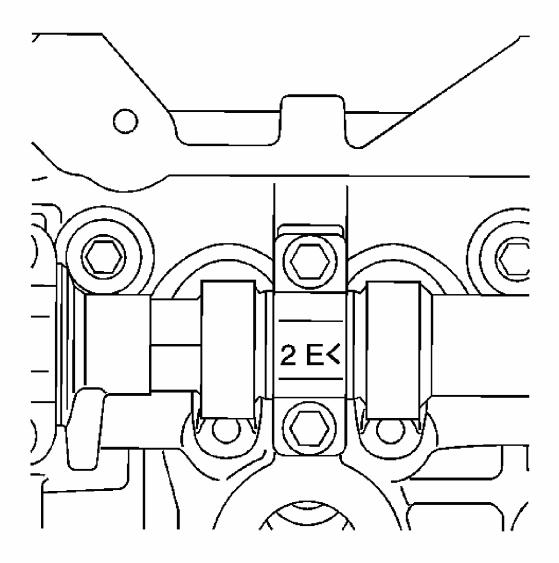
View Of Exhaust Camshaft Bearing Cap Markings Courtesy of GENERAL MOTORS CORP.
